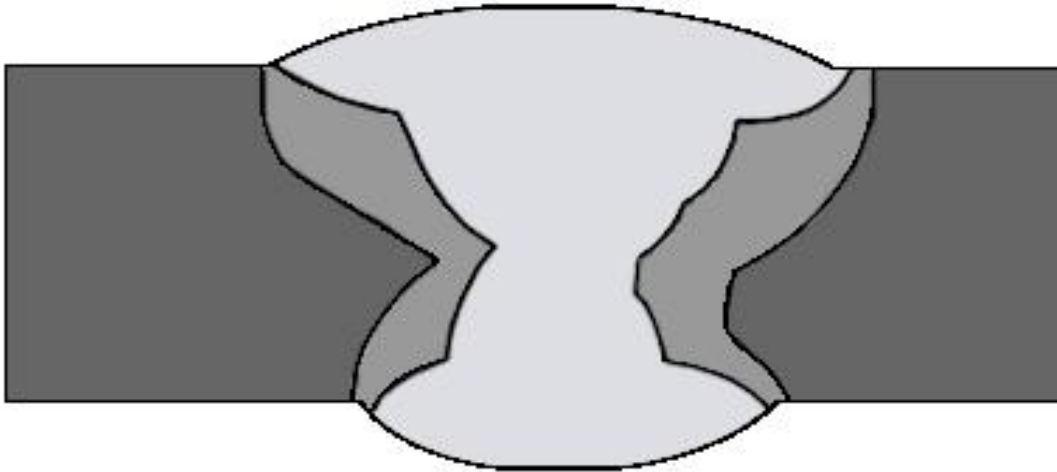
The cross-section of a welded butt joint, with the lightest gray representing the weld or fusion zone, the medium gray the heat affected zone (HAZ), and the darkest gray the base material.
